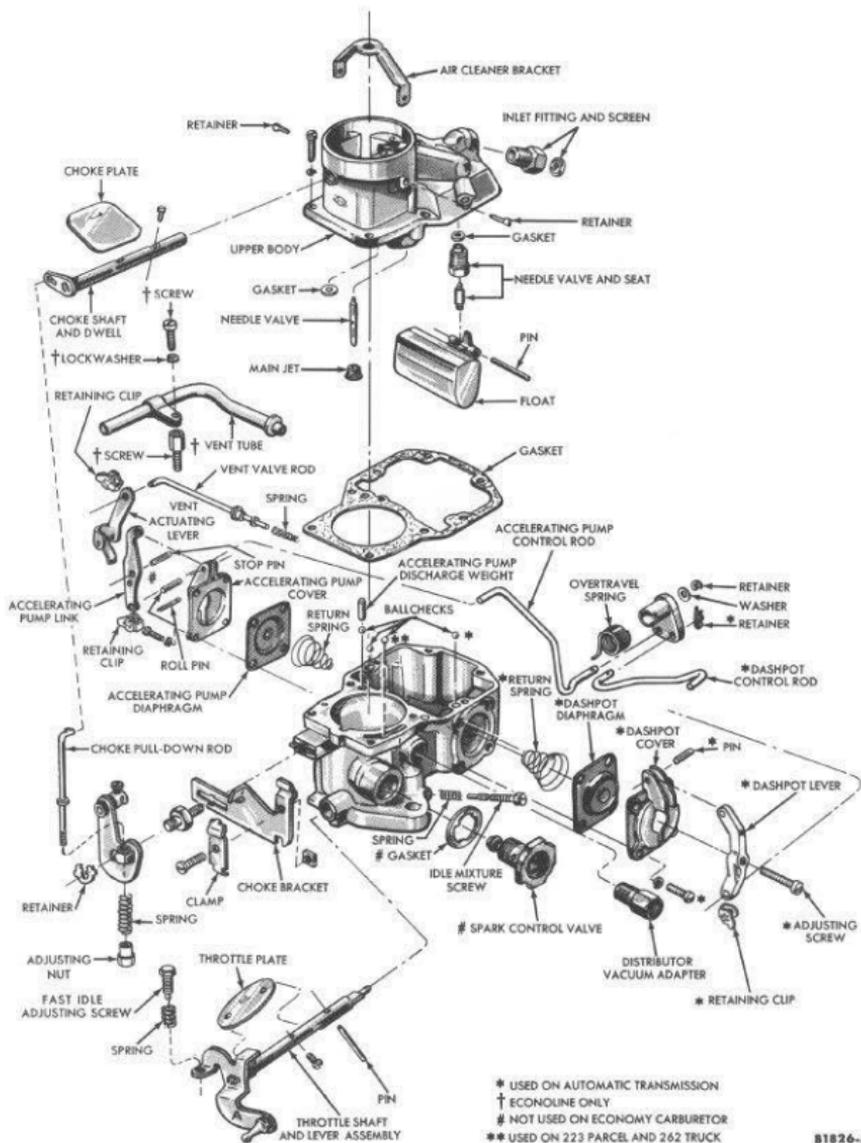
Single-Barrel Carburetor Without Automatic Choke—Disassembled
